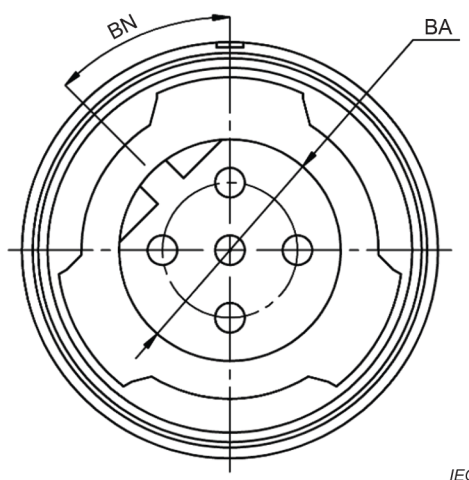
Front view of the female side of the push-pull housing for B-coding
